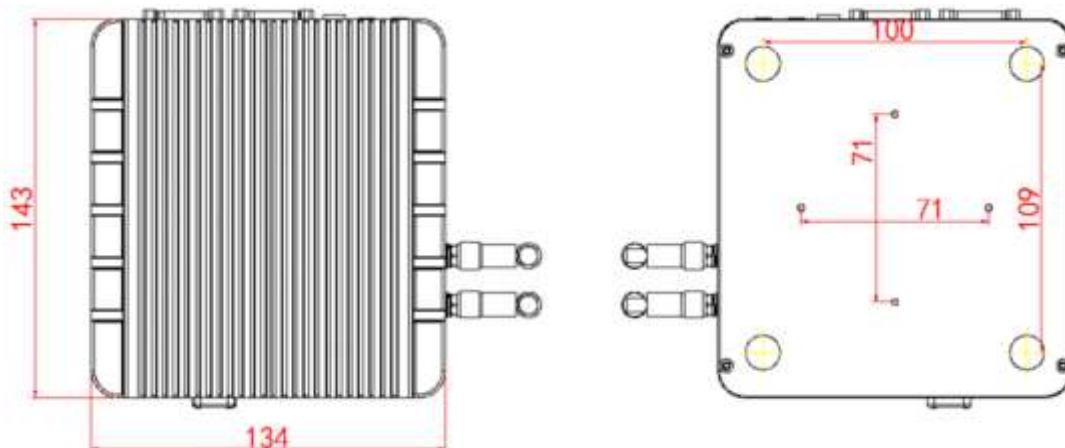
NIS-B987 Upper and lower cover mechanical dimension drawing
